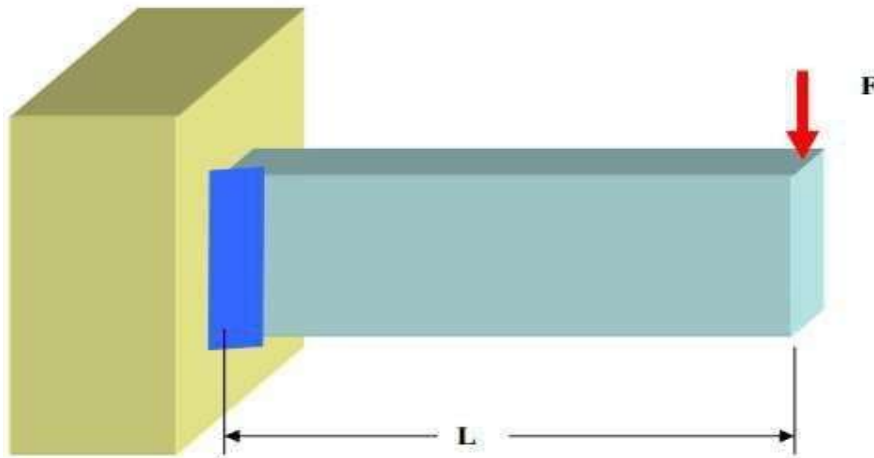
Eccentrically loaded welded joint
